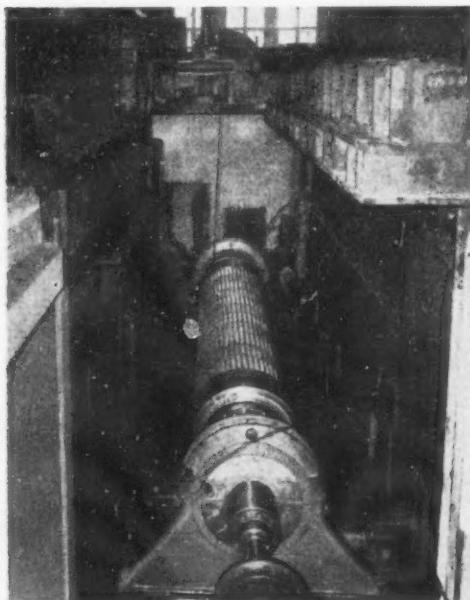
One of the overspeed test pits in the steam turbine generator shop at the Electrosila Works, Leningrad. A hydrogen cooled rotor is seen being prepared for testing and balancing with portable electronic equipment
